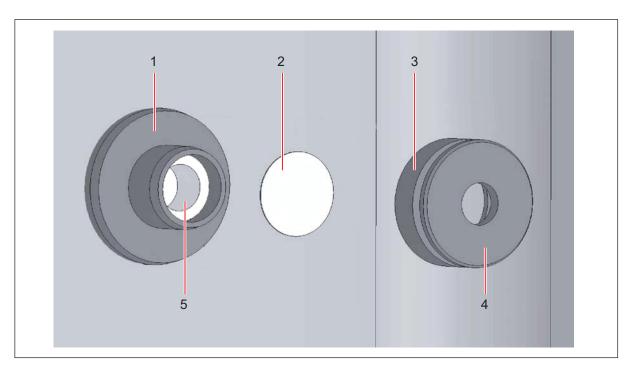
Hydrophobic filter and holder assembly (exploded view)
